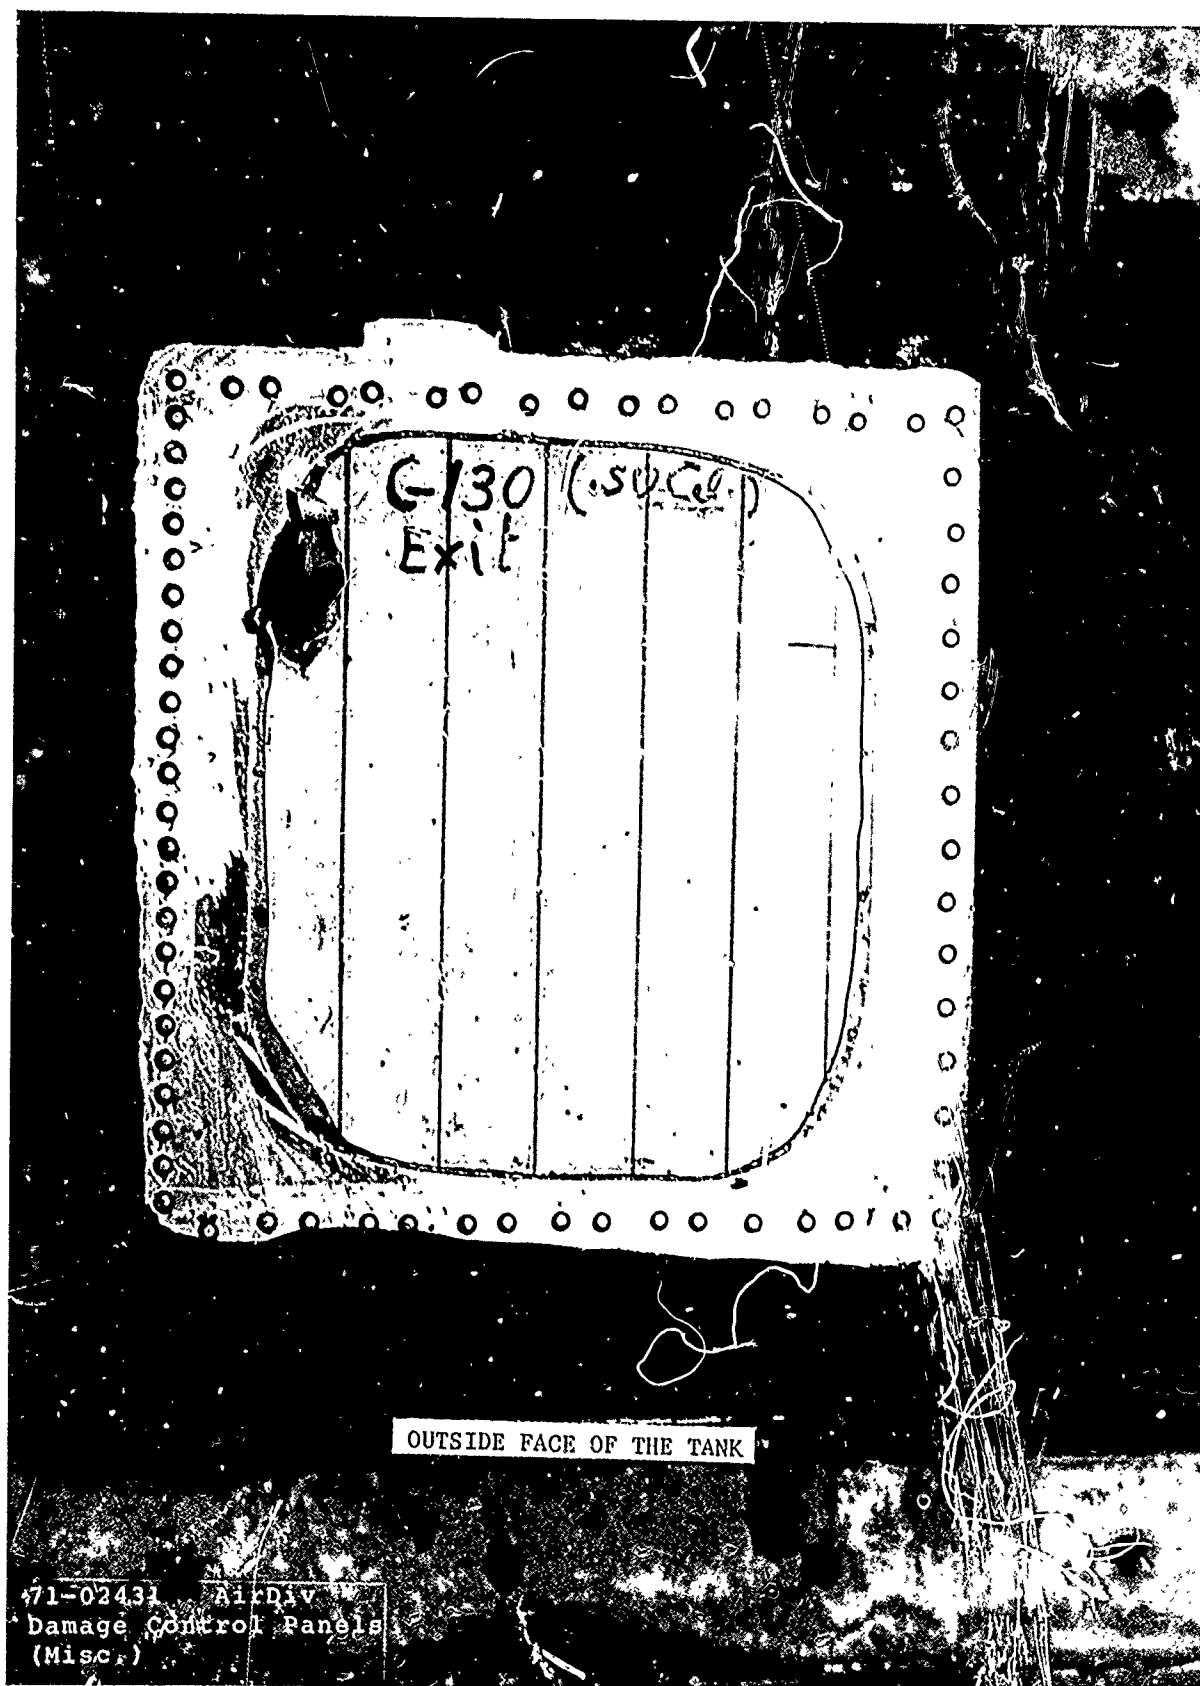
C-130 PANEL WITH DAMAGE CONTROL PROTECTION - EXIT SIDE
